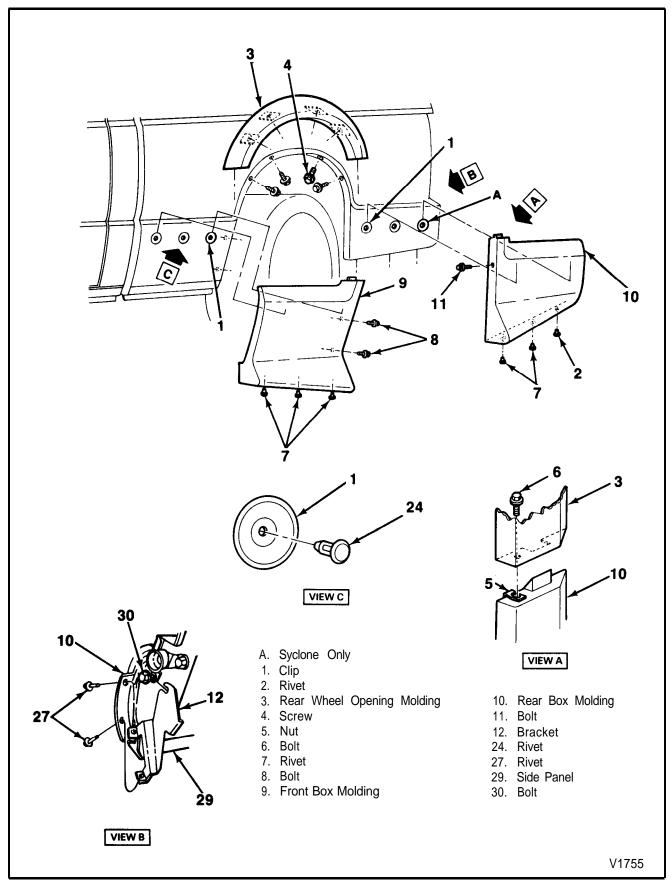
Rear Wheel Opening and Front and Rear Box Moldings (Syclone and Typhoon)
